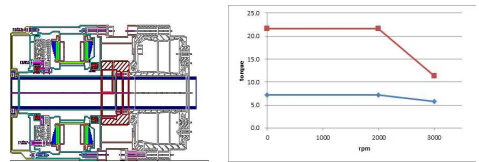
Drawing and T-N curve of 1.5kW Hollow shaft motor
